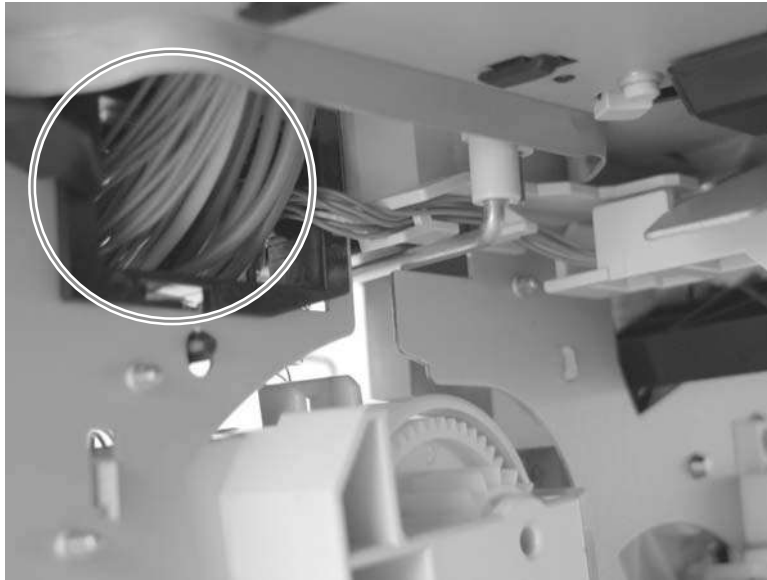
Remove the high-voltage power-supply assembly (5 of 7)
